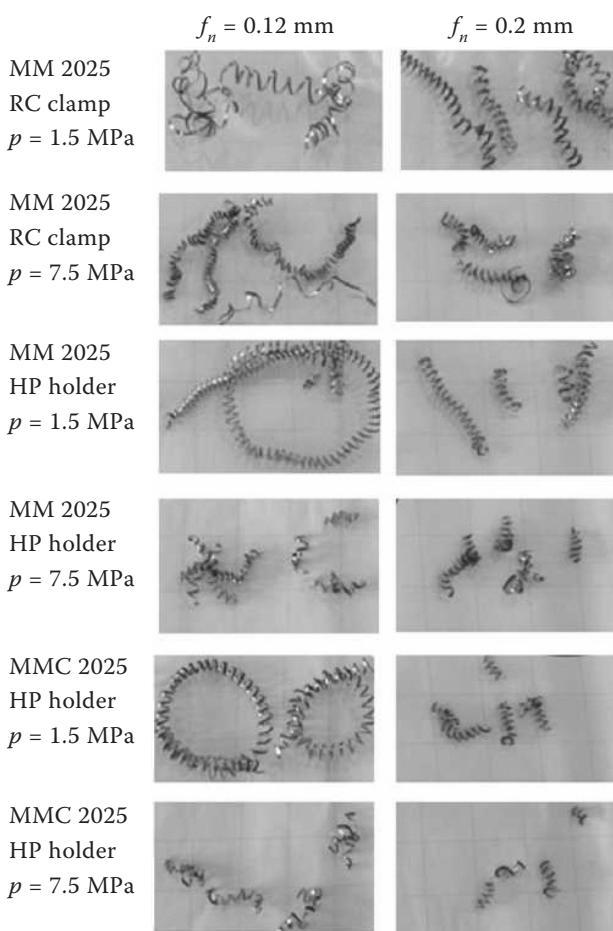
Chip generated in machining using different geometries, clamping systems and cooling emulsions pressures at two different feeds
